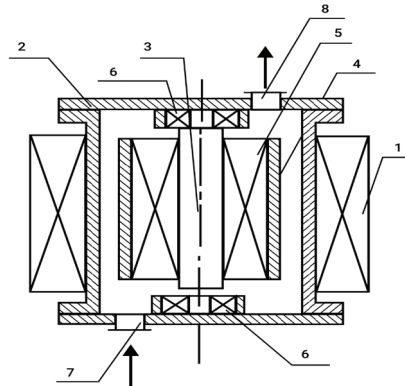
Installation for preliminary electromagnetic treatment of soap solutions of detergents: 1- stator; 2- sleeve; 3- shaft; 4- rotor sleeve; 5- rotor; 6- bearings; 7- inlet pipe; 8- outlet pipe.
